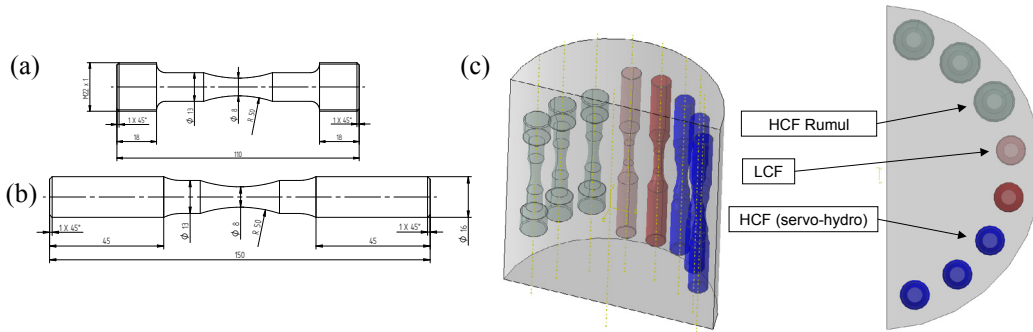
Details of fatigue experiments: a), b) shape and dimension of HCF specimens; c) positions of the specimens in the railway axles segments.
